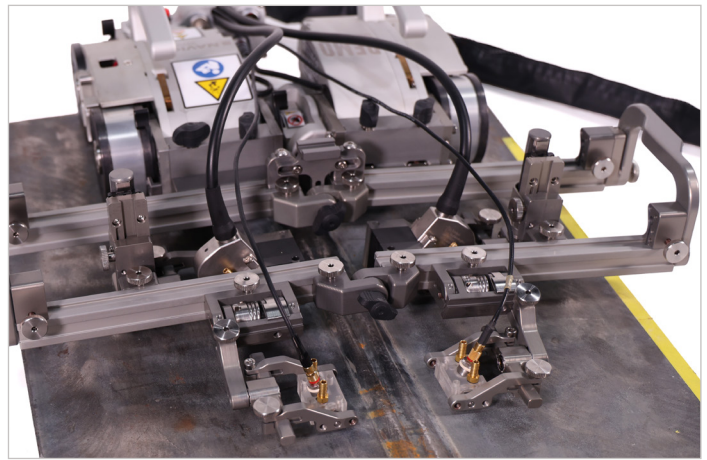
and 10: Automated crawler for corrosion and weld inspection. Handles removable.
